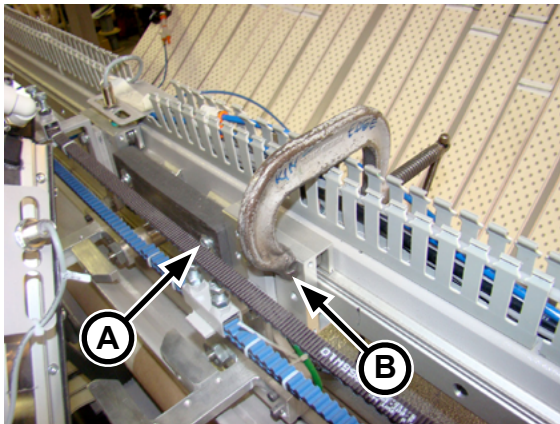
Make sure the spreader clamp carriage assemblies are firm against the center block.
